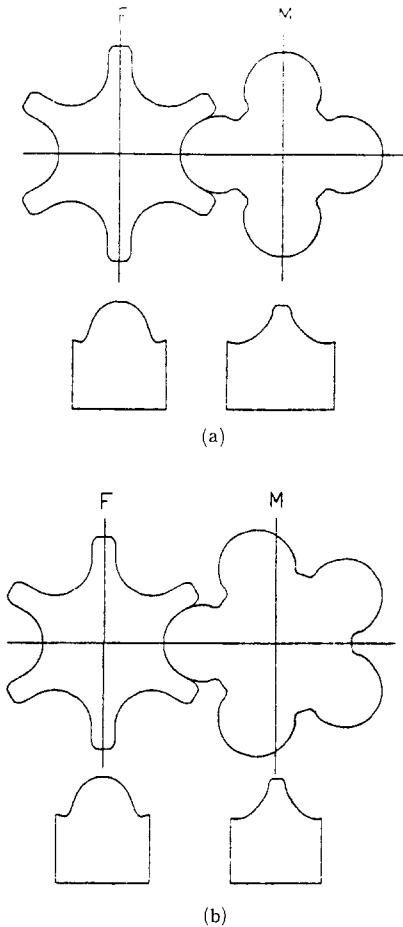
(a) The tooth profile of the symmetric screw rotor(4-6) and cutter
